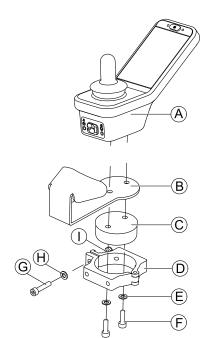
The remote in the graphic serves as an example. Every possible remote is mounted in the same way as shown. Mount remote B with support B and support drum C to clamp D with screws F and washers E.
